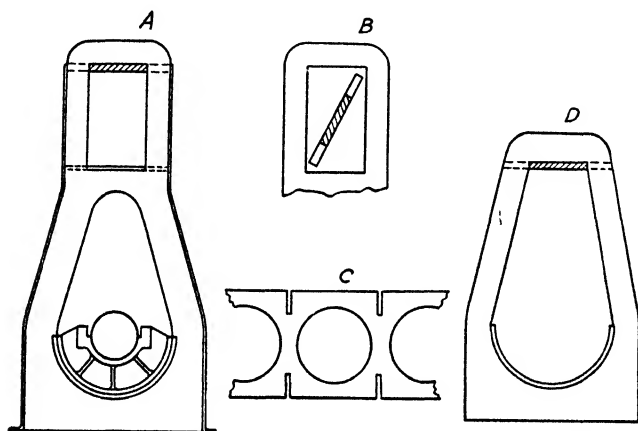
ELEMENTS OF STEVENS WELDED ENGINE FRAME.
